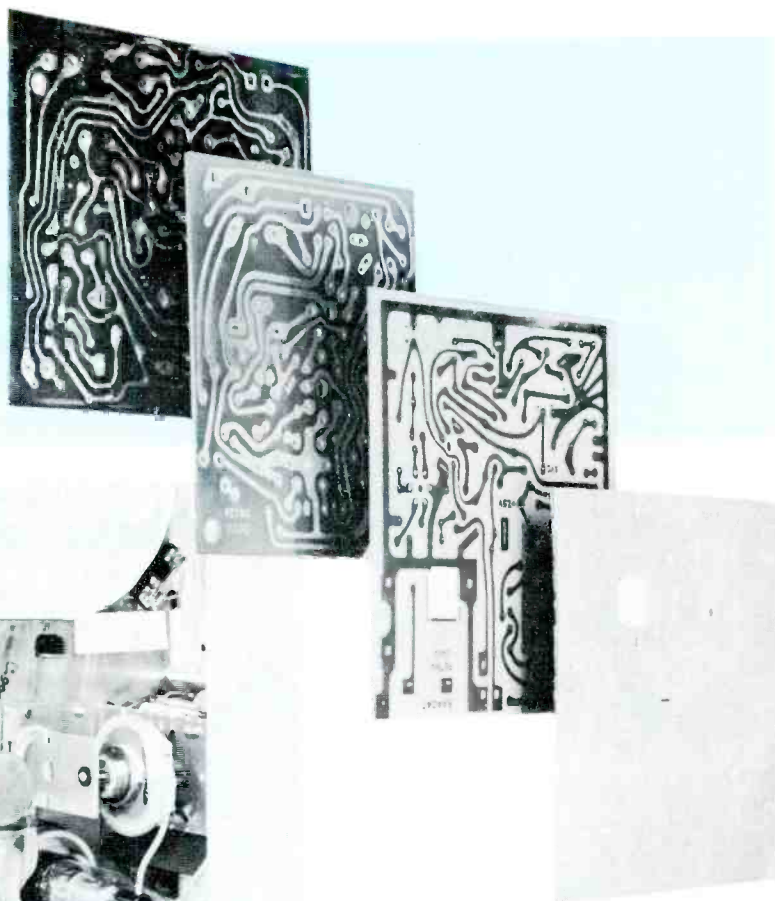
Receiver in Which Extensive Use of Printed Boards Is Made.
